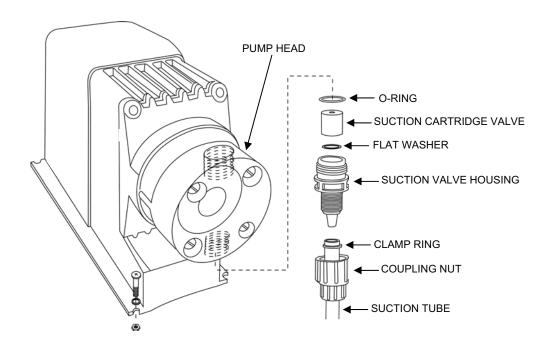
Chemical Injection Pump Suction Valve Assembly Replacement.
